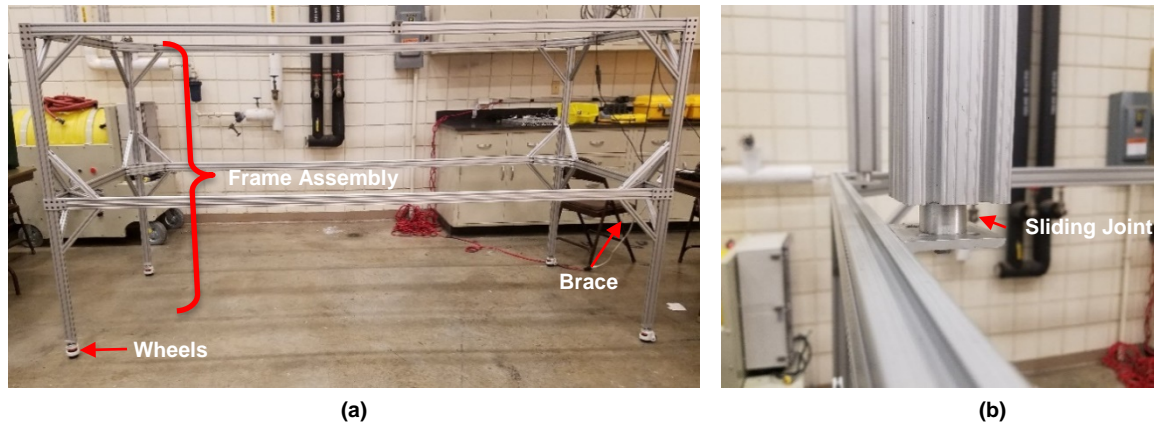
(a) Frame Assembly with the major components identified and (b) Sliding joint connecting the top and bottom frame assemblies.
